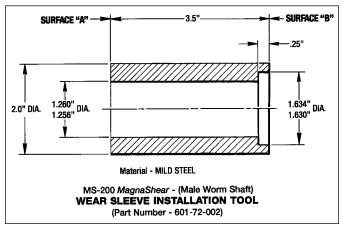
Wear Sleeve Installation Tool #601-72-002
